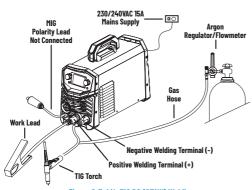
Lift TIG DC (GTAW) Welding
